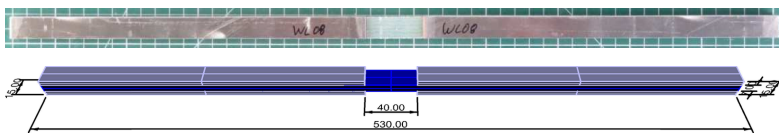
WL coupon geometry with straight gauge section and bonded aluminium tabs. 7 mm thick.
